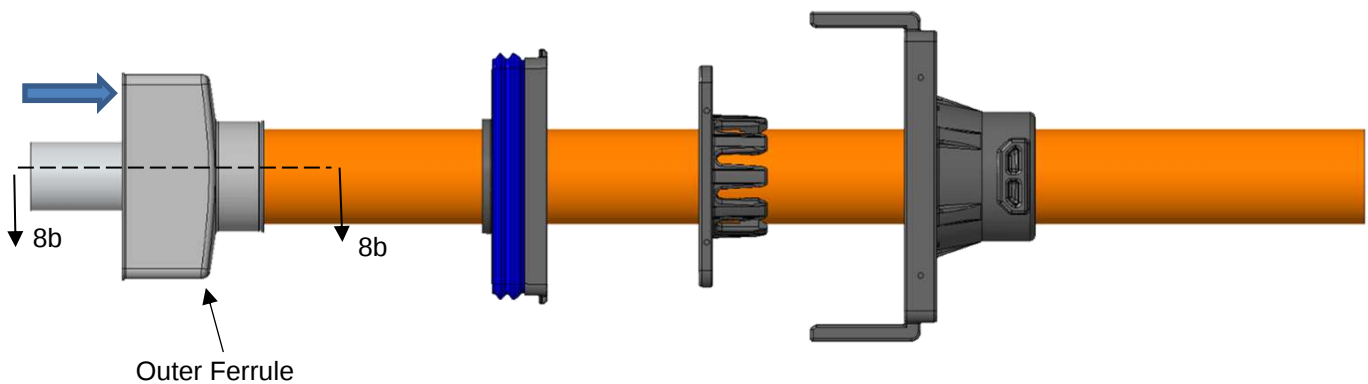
Slide the outer ferrule over the folded back braided cable shield
